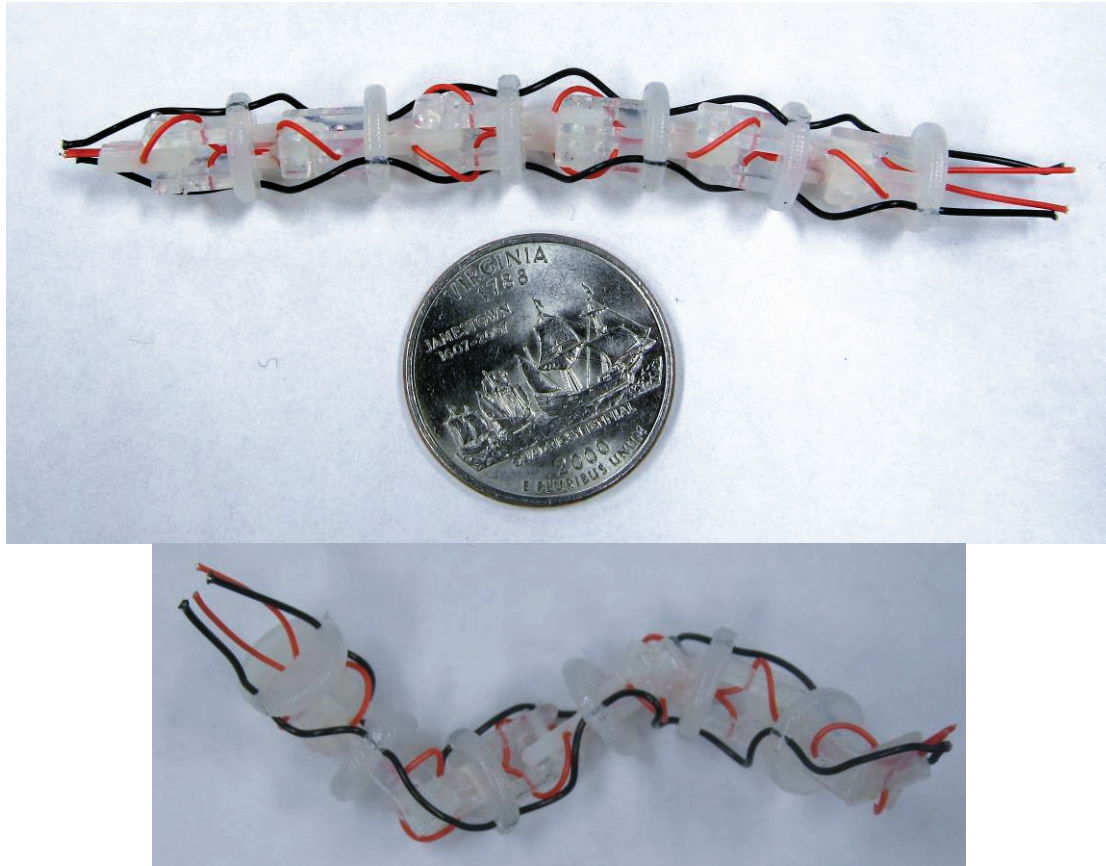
Two different orientations of prototype of 6 DOF robot manufactured using in-mold assembly
